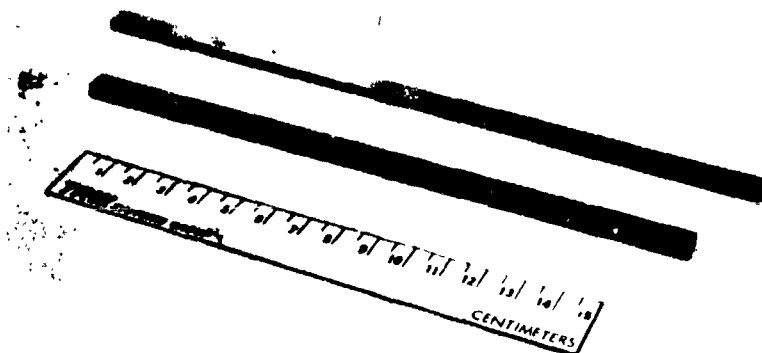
Copper Forming Bar and Unwelded Tantalum Tube
